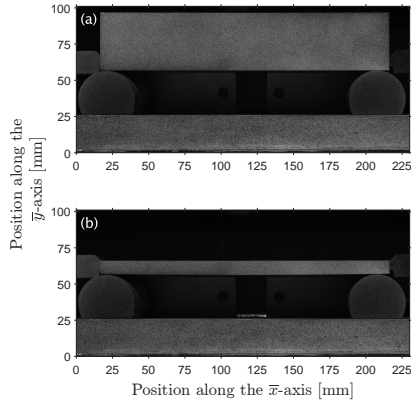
(a) Workpiece before machining, (b) Workpiece after the machining of 60 layers.
